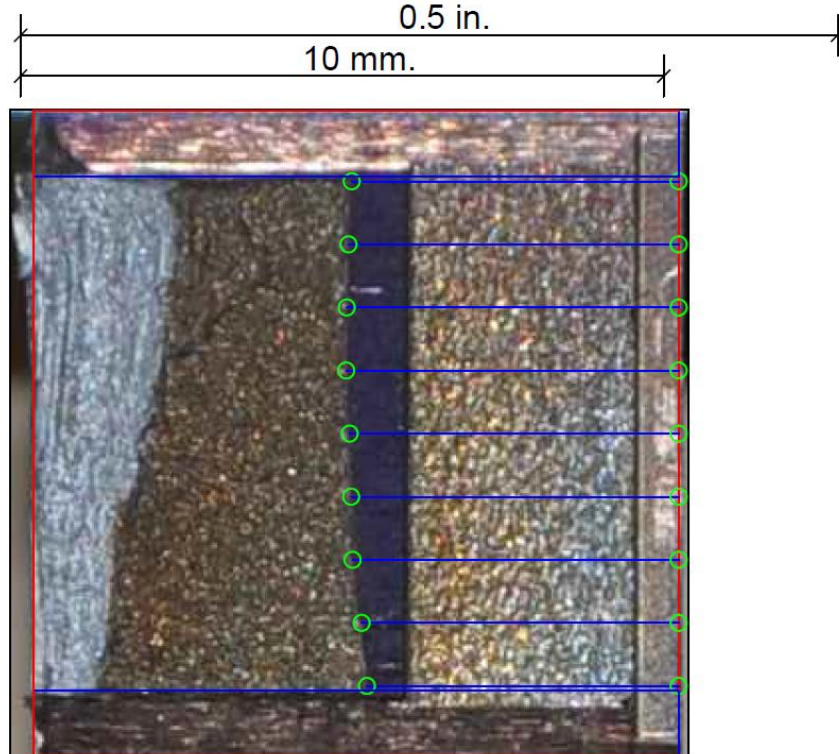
Specimen C12' Fracture Surface
